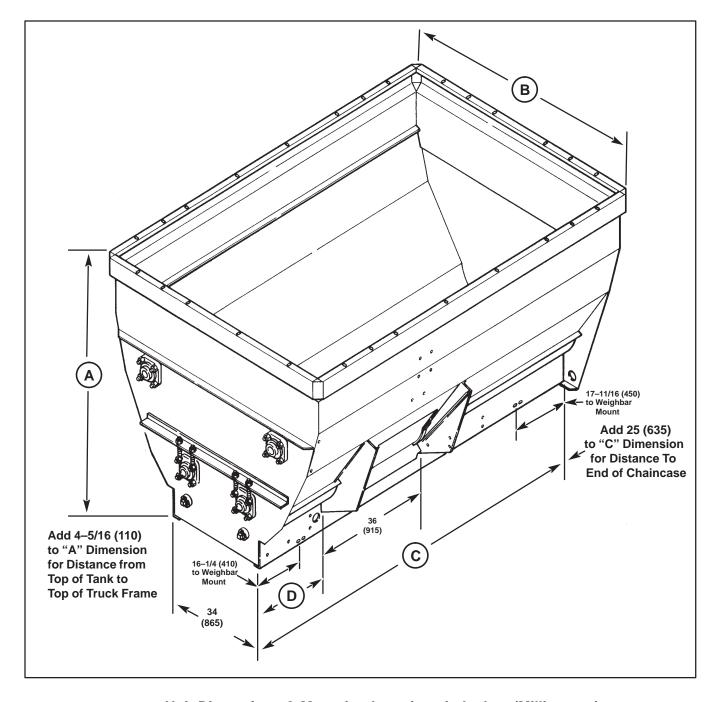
Unit Dimensions & Mounting Locations in Inches (Millimeters)
